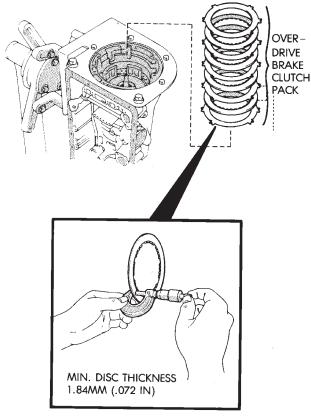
Removing/Measuring Overdrive Brake Disc Thickness
